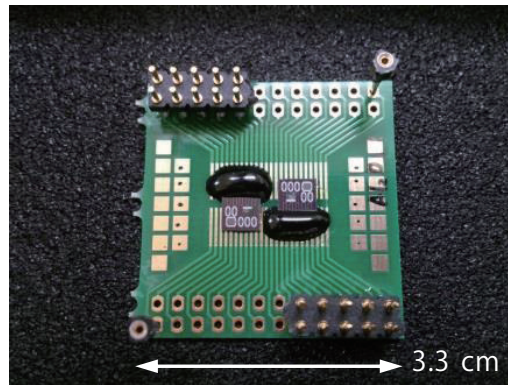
(Color online) Photograph of pMUT chips packaged on printed circuit board.
